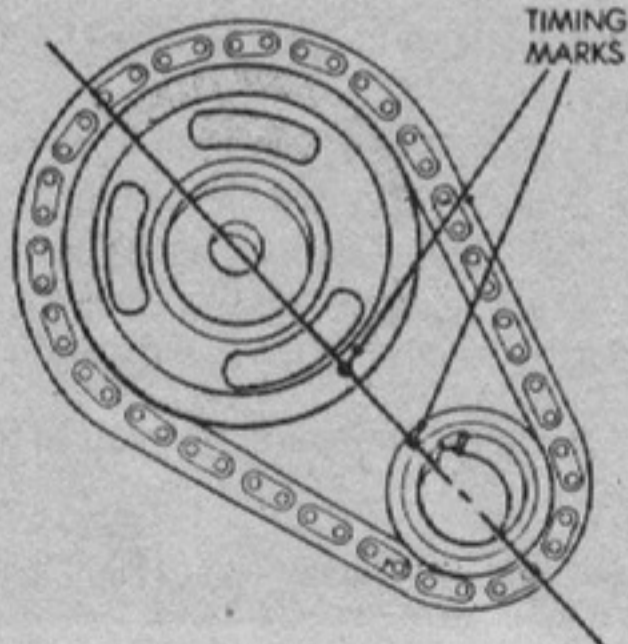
Crankshaft/camshaft sprocket alignment—2.5L engine
